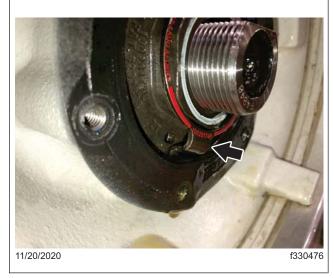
, Lower Snap Ring Tab is not Fully Installed in the Spindle Nut Locking Hole
